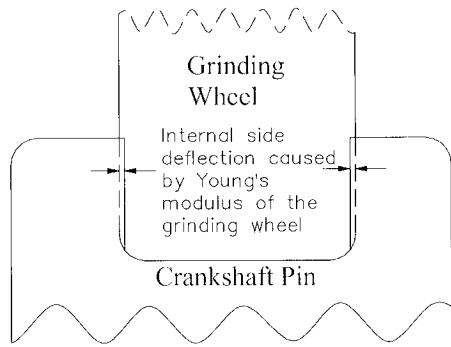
Elasticity of the grinding wheel on the side of the crankshaft pin
